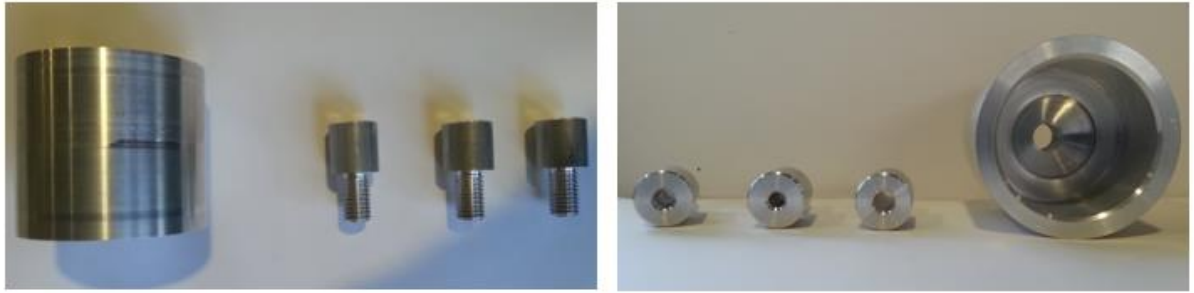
THE NOZZLE HOUSING AND THE REPLACEABLE NOZZLE DIAMETERS
